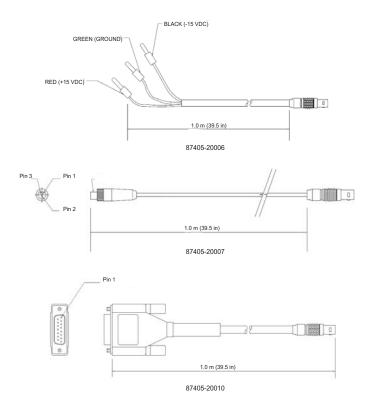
Drawings of Replaceable Parts for 87405C Preamplier
